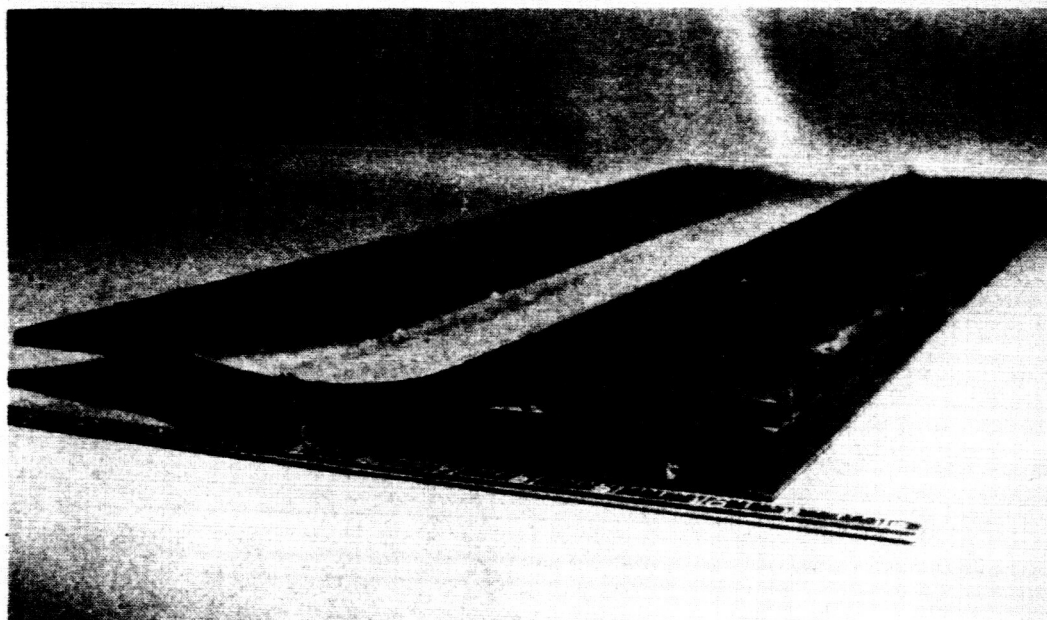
MACHINED DEVELOPMENTAL PACK FLANGE RADII
